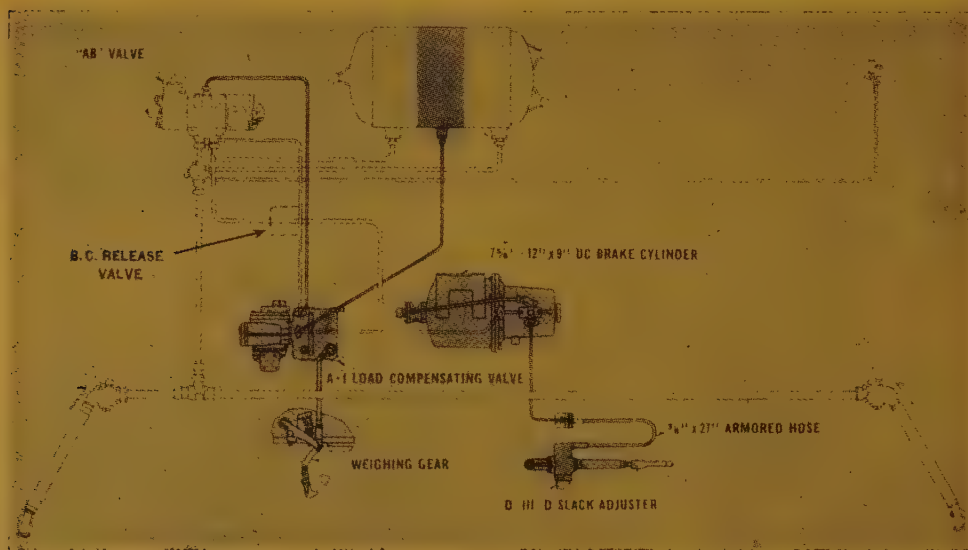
Piping diagram of the complete load compensating brake equipment.
